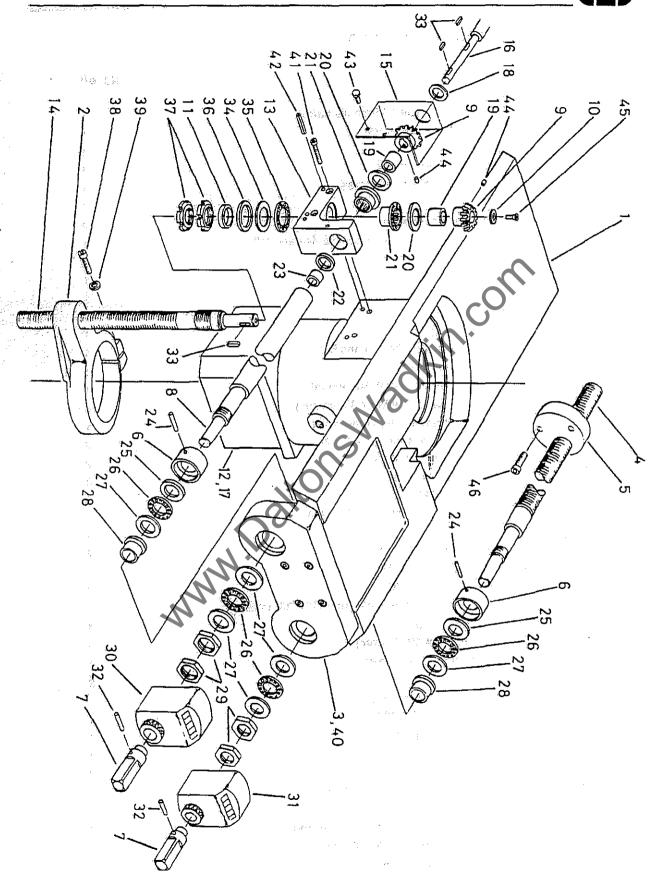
NEAR SIDE HEAD CARRIAGE ADJUSTMENTS
